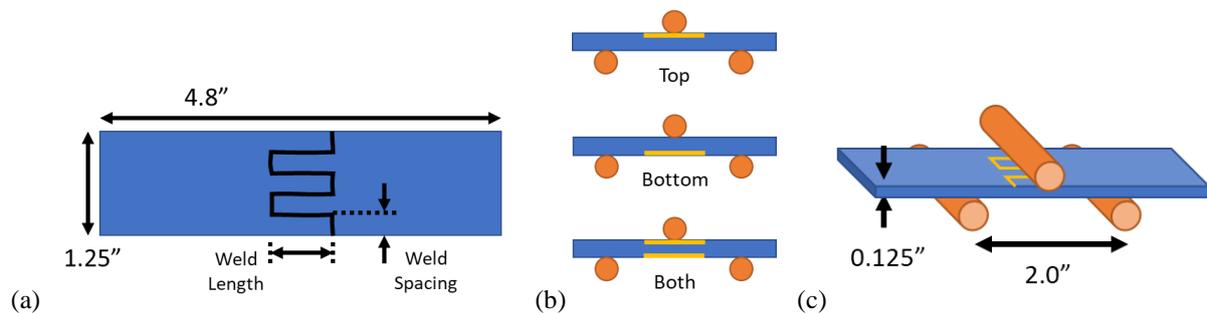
(a) Part Dimensions (b) Position of Weld (c) 3-pt Flexural Setup
